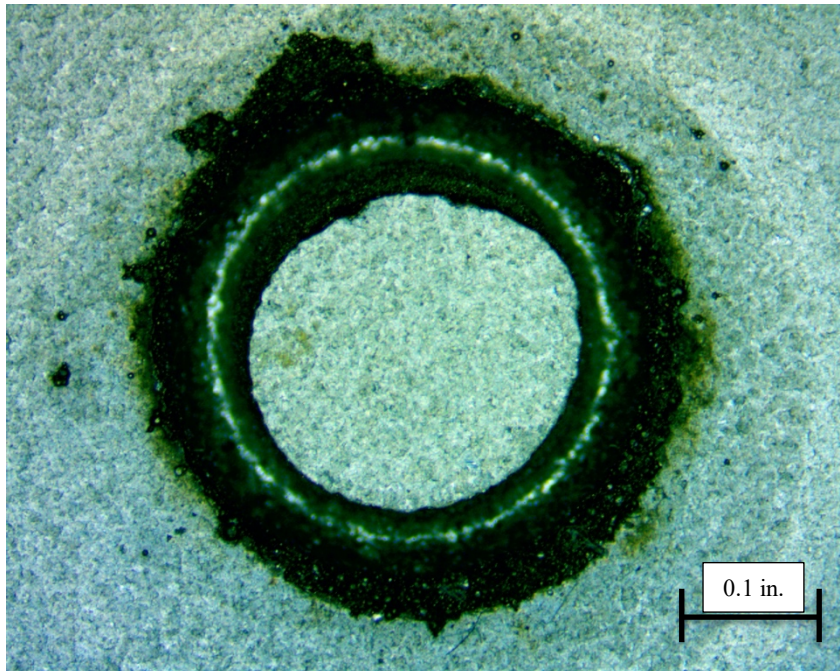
Task 1.2 Cut 1 with a Cut Depth of 0.1 in., an Electrode Diameter of 0.33 in., and a Fastener Material of Inconel
